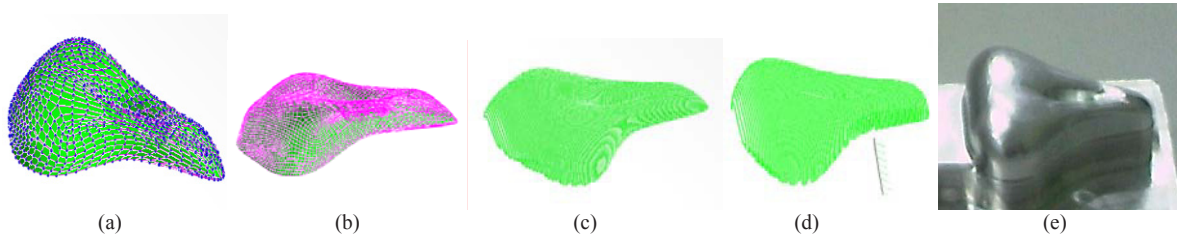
example of CL surface deformation (a) initial mesh (b) deformed CL surface (c) tool path in deformed space (d) tool path of inverse deformation (e) machined part
